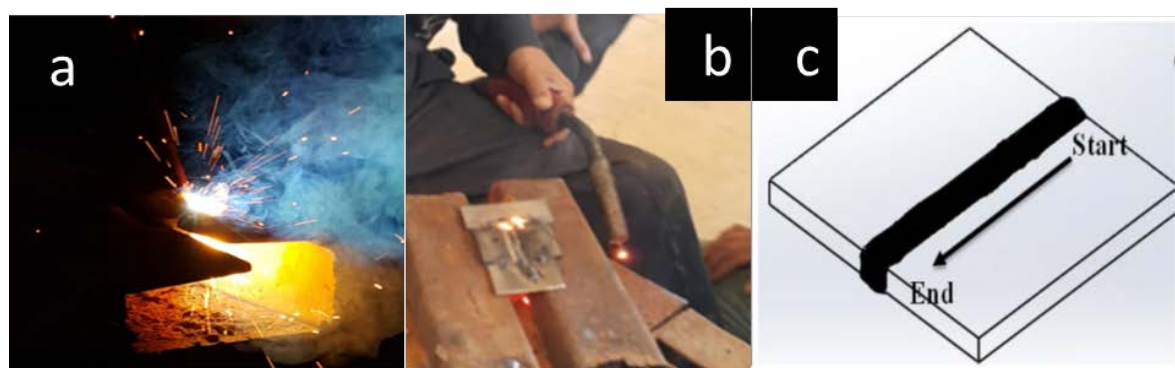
(a) and (b) A picture showing the electric arc welding of the carbon steel plates and (c) a schematic describing the welding direction
